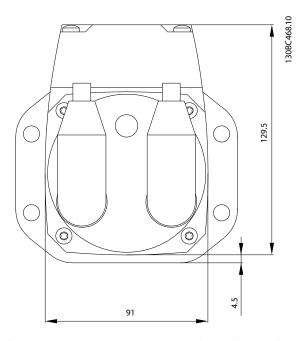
Rear View: Servomotor with ISD Flange, without Brake
